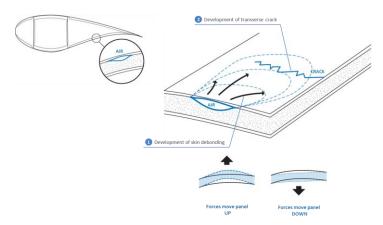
Hypothesis for the formation mechanisms of transverse cracks in blade panels. The initial debonded zone grow under cyclic loads until a critical size is reached, at which the skin starts to fracture due to high stress concentrations.
